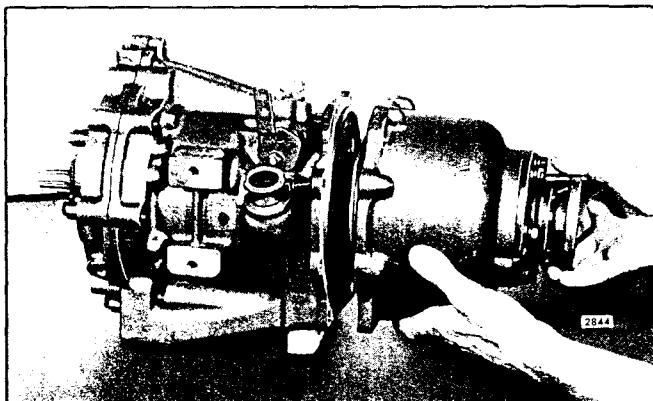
Removing or Installing Reduction Gear Assembly from/on Reverse Gear Assembly
